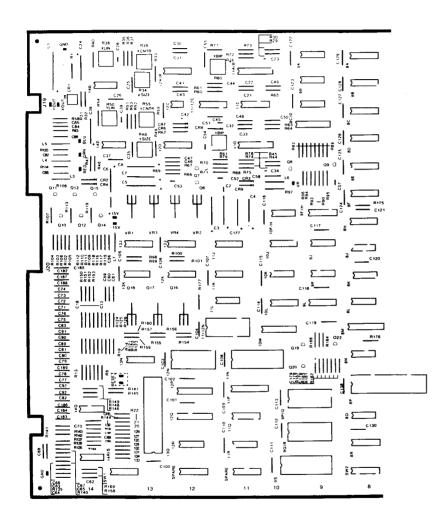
Major Havoc PCB Assembly A041347-21 A
